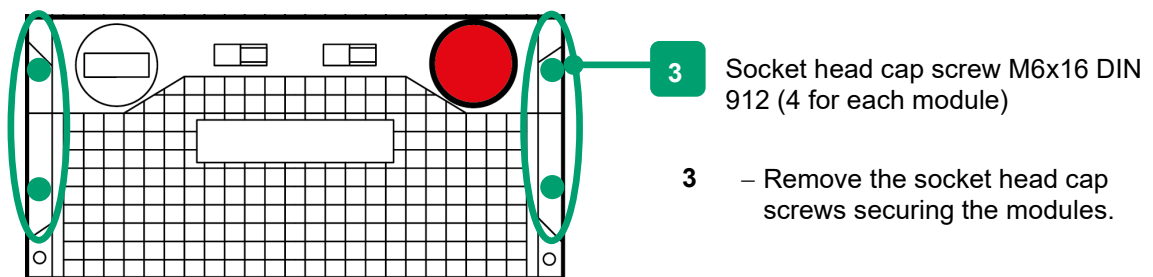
REMOVING THE BATTERY MODULE SCREWS
